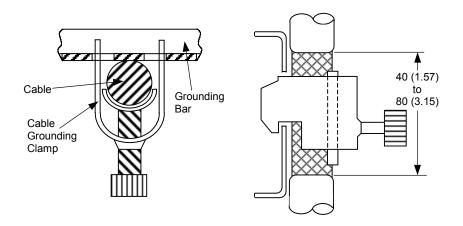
Detail of Cable Grounding Clamp A99L-0035-0001
